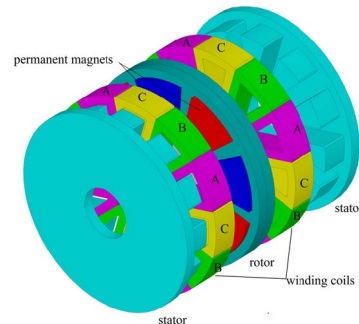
3-D view of a four-pole-pair/12-slot DSSR AFPM machine.
